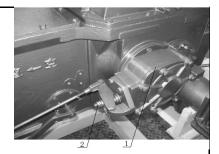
Brake Pedal Adjustment 1. Lock Nut 2. Adjustment Rod
